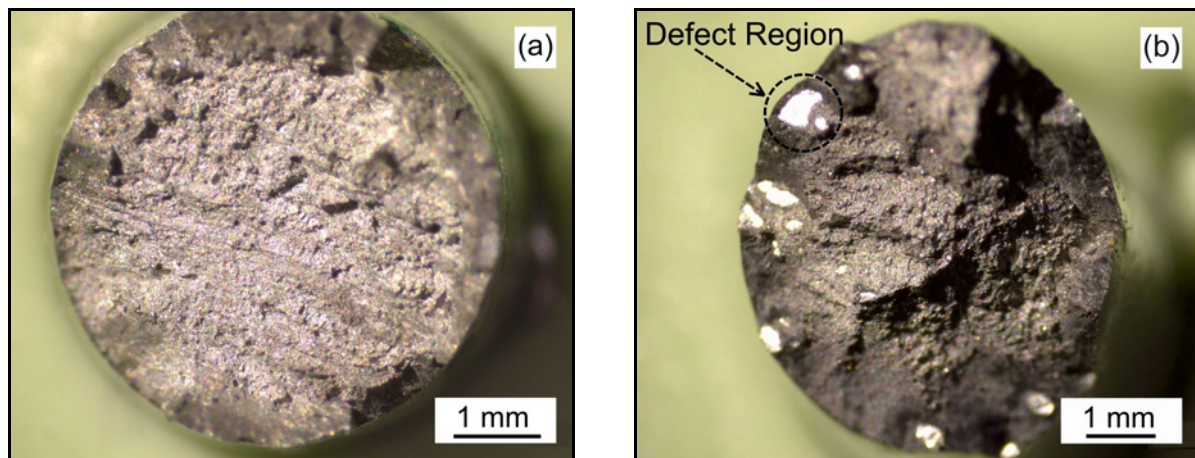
Fracture surfaces of as-built samples: (a) horizontally built and (b) vertically built.
